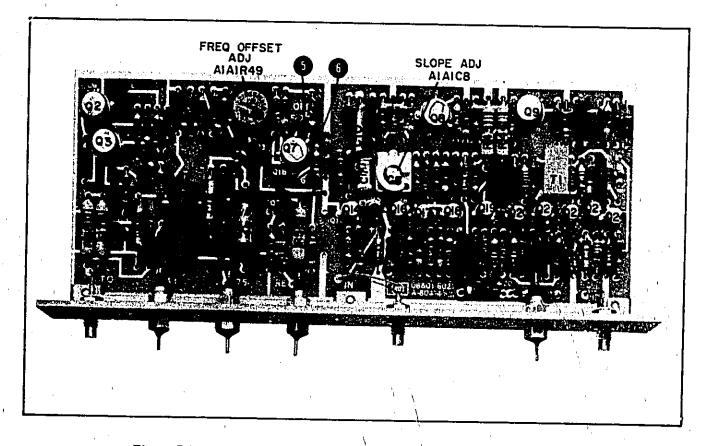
Component Identification, A1A1 Discriminator Assembly (Part of Change 10)
